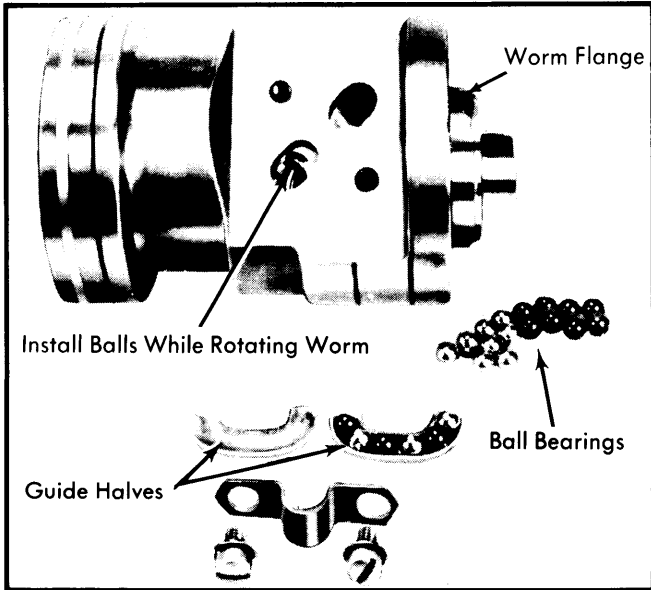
Installing Ball Bearing into Rack-Piston Assembly
